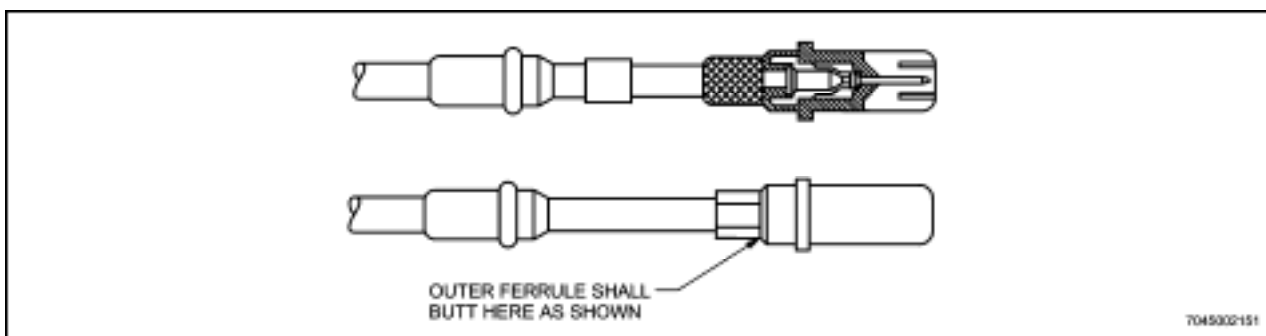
Final Assembly and Outer Ferrule Crimping
